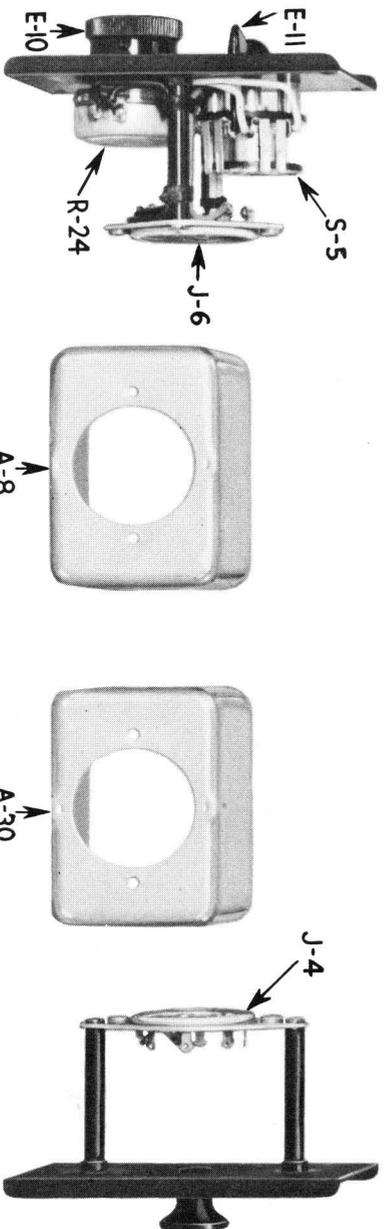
TYPE CBY-23154 SWITCH PANEL (LEFT), SIDE VIEW, WITH COVER REMOVED, AND TYPICAL SWITCH PANEL ADAPTER (RIGHT), SIDE VIEW, WITH COVER REMOVED
